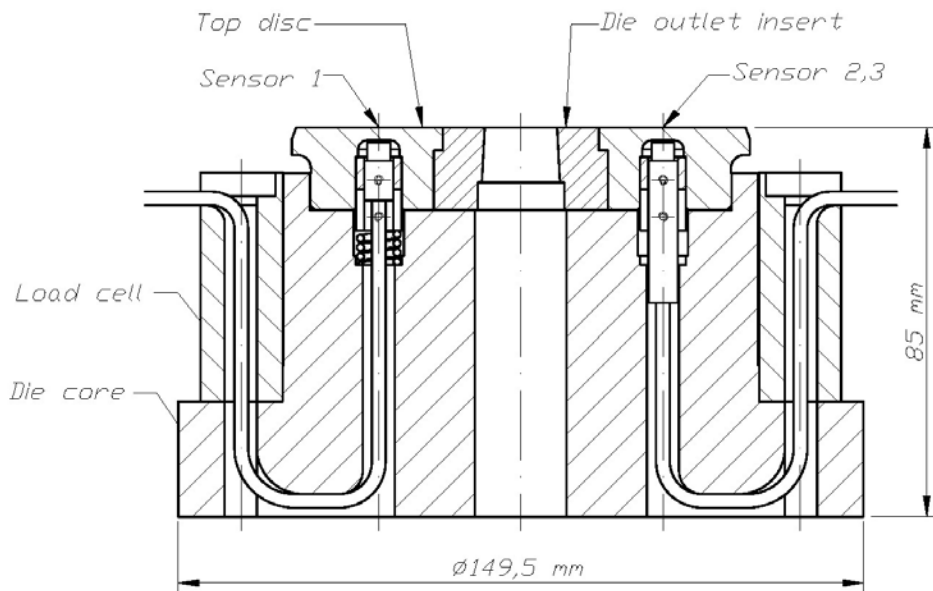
Assembly drawing of the complex rod extrusion die (not to scale).
